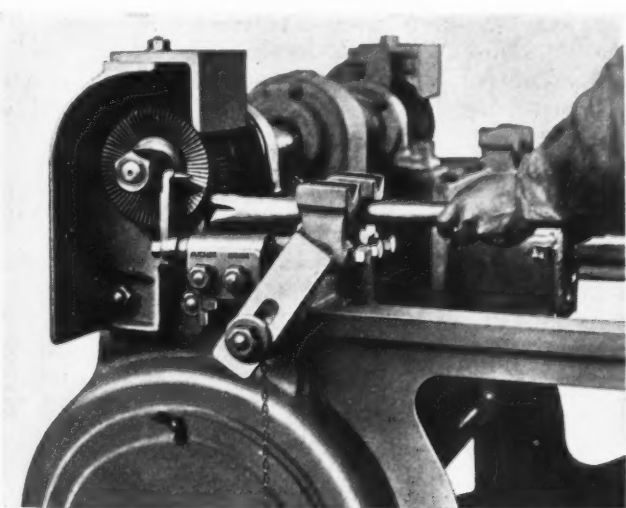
Hot-milling the Cutting Edges of a Cross-bit Rock Drill
